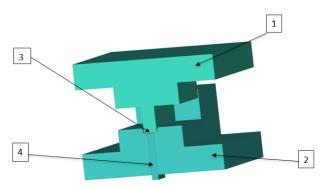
Three-dimensional model of the die block 1 - punch, 2 - die, 3 - blank, 4 - ejector
